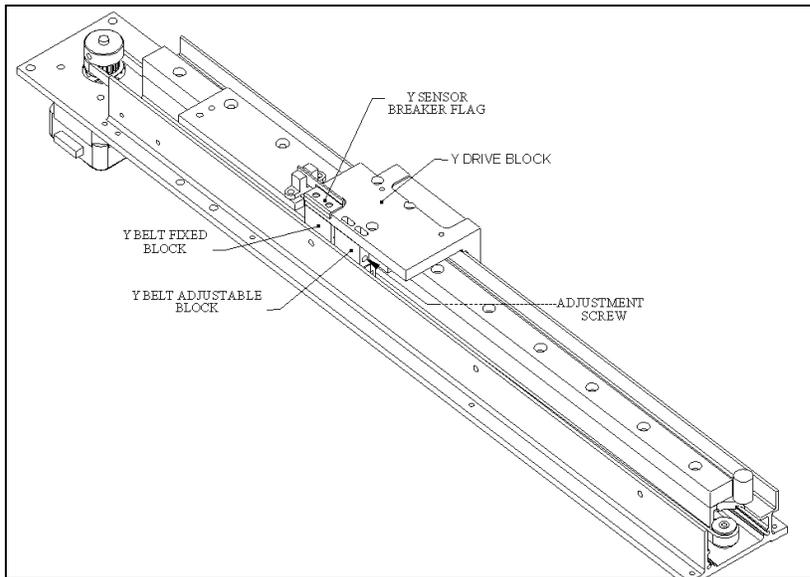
Removing the Sensor Flag and Belt Blocks
